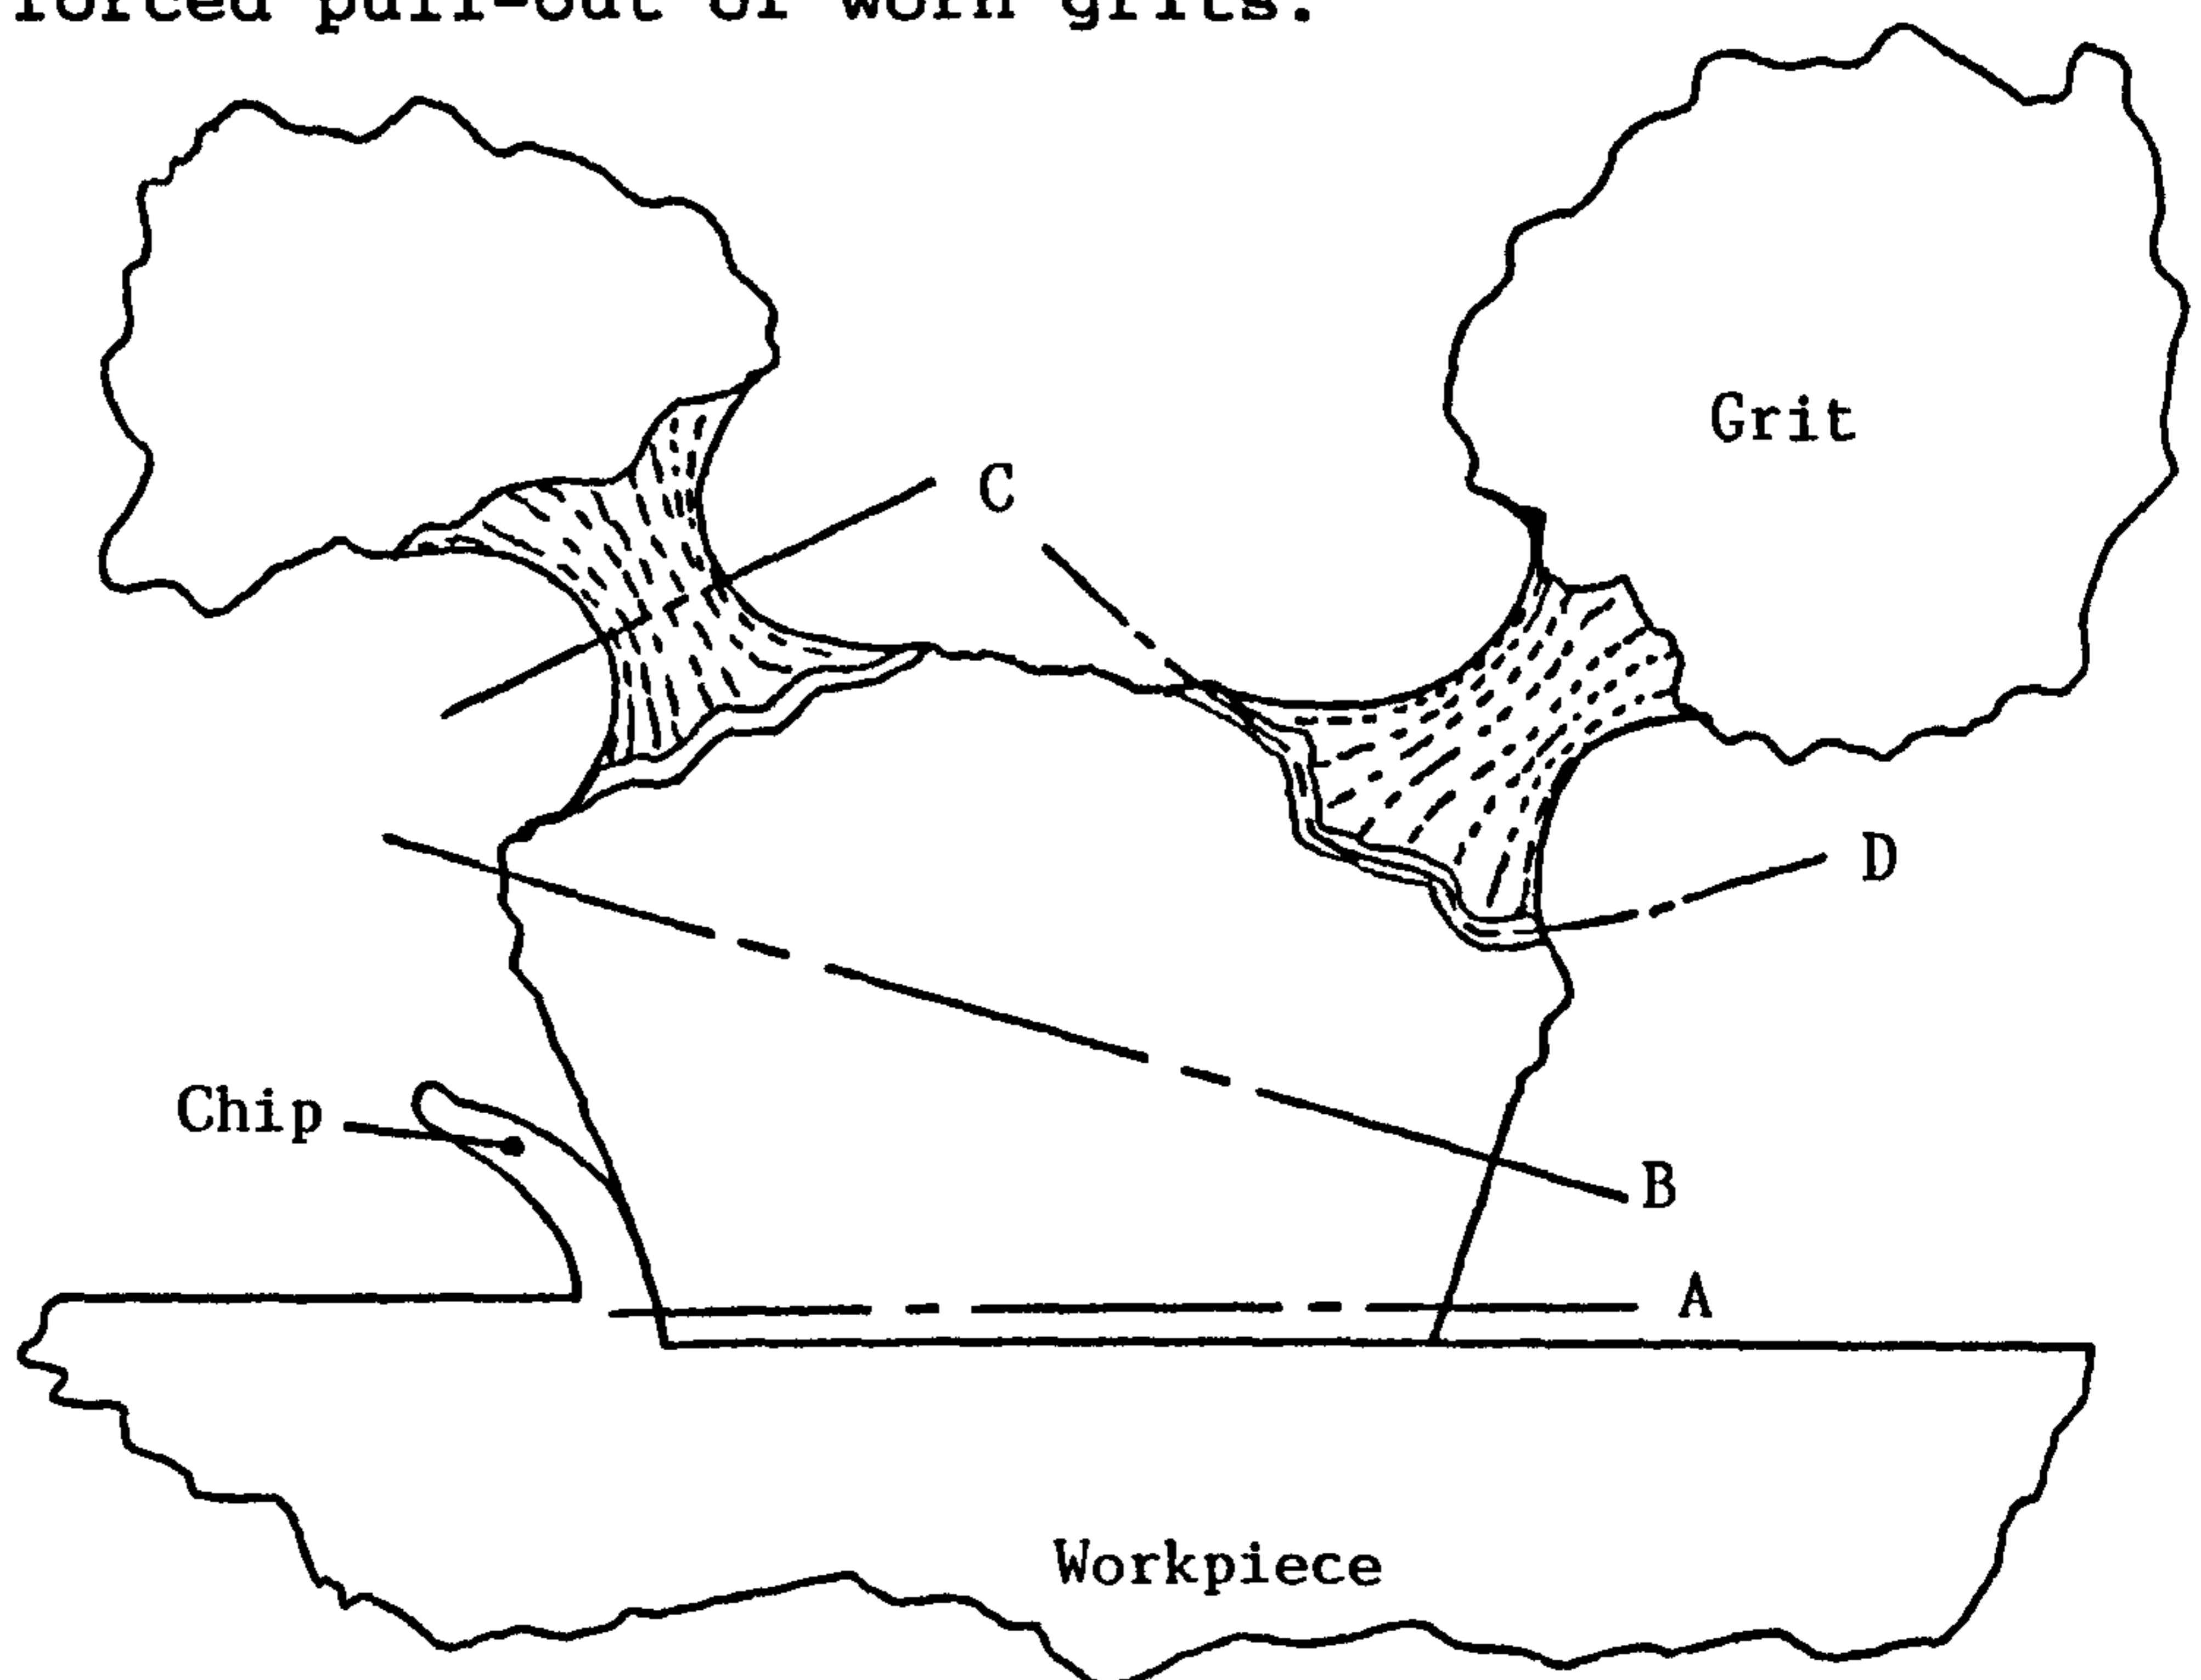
Illustration of principal wheel wear mechanisms: A - abrasive wear; B - grit fracture; C - bond fracture; D - fracture of reaction interface between grit and bond.
